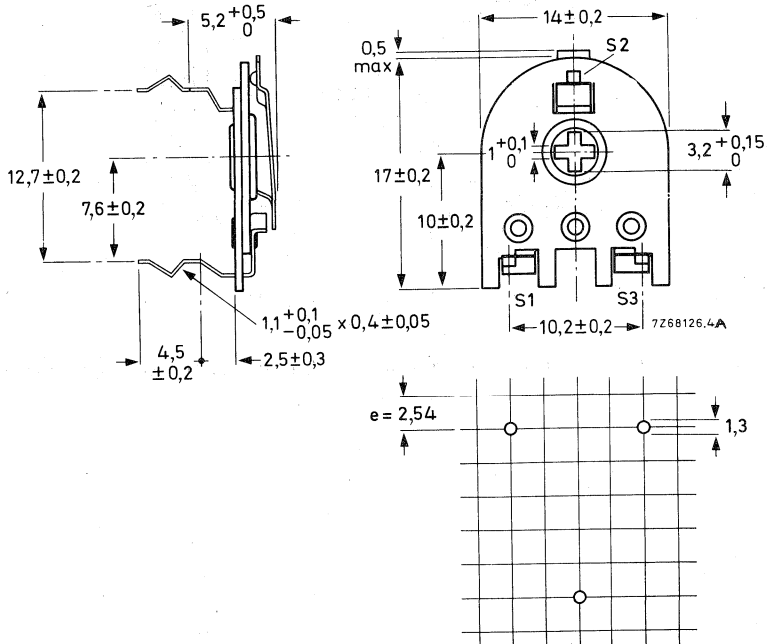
Potentiometer for horizontal mounting, with snap-in printed-wiring pins, 2322 409 083..
